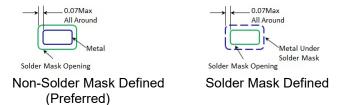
Solder Mask Pattern (Dimensions are in mm)
